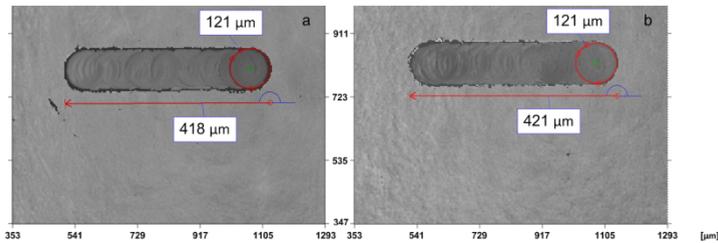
Milling geometry in TiAl6V4 without (a) and with (b) mechanical interface
